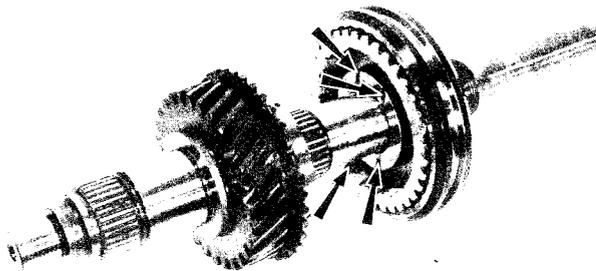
Installing clutch assembly (1st & 2nd)
